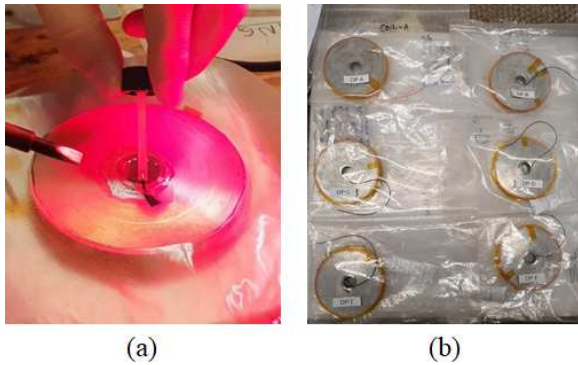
Extra shunting by soldering. (a) is the surface soldering process, (b) is the soldered pancakes after testing. The coils stored inside a plastic bag with moisture absorber.
